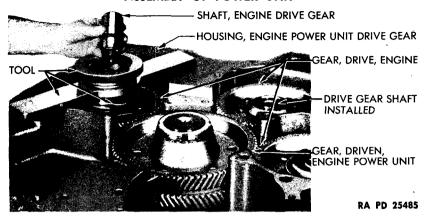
Installing Engine Drive Gear Shaft In Gear
